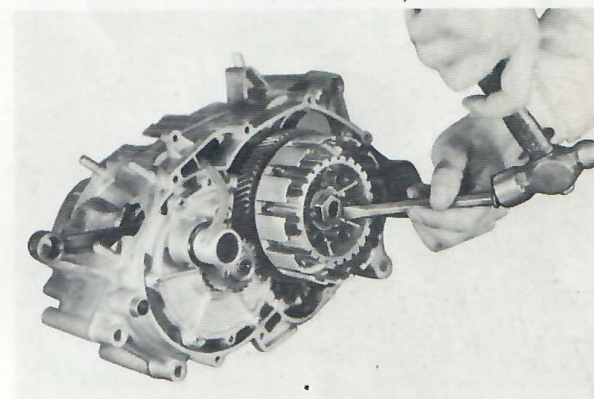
Straightening clutch sleeve hub washer with chisel and hammer
